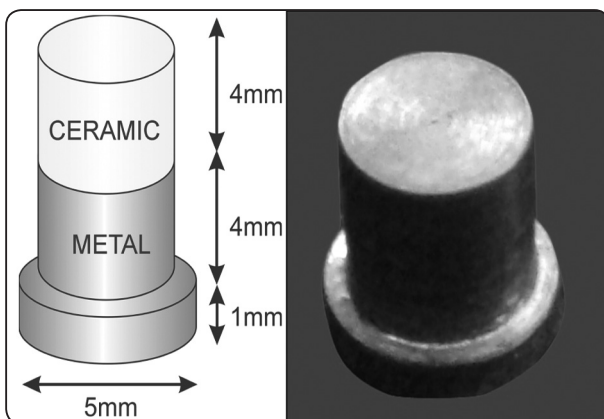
Diagram showing sample dimensions, left. Metal part of the sample ready to receive the opaque and porcelain build-up.
